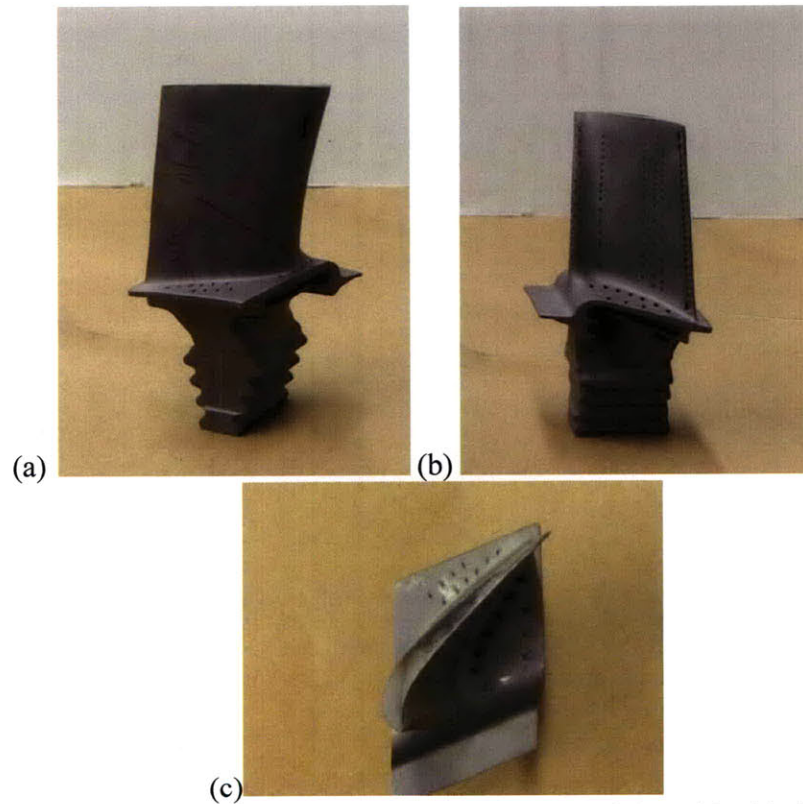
(a-c) Front, back, and top view from one of the turbine blade samples
